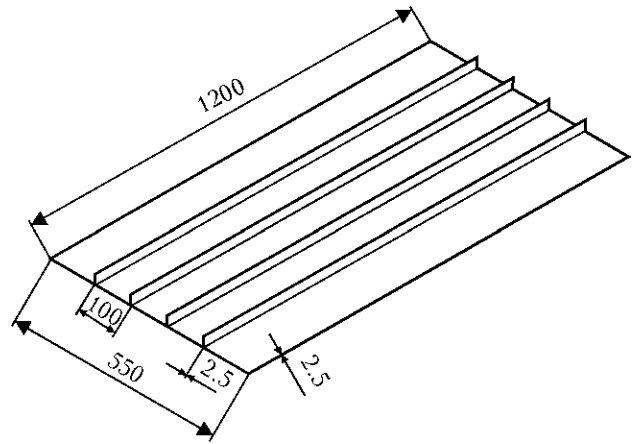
Sketch of welded panel manufactured of titanium alloy VT20
